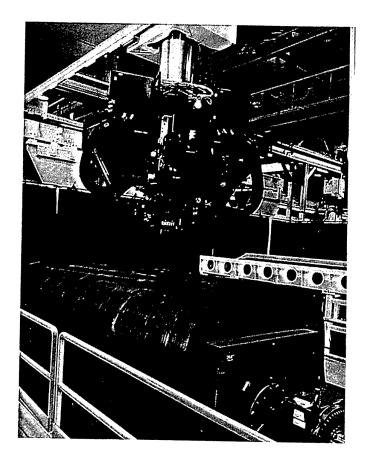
14-axis tapelaying machine above a positive fuselage tool
